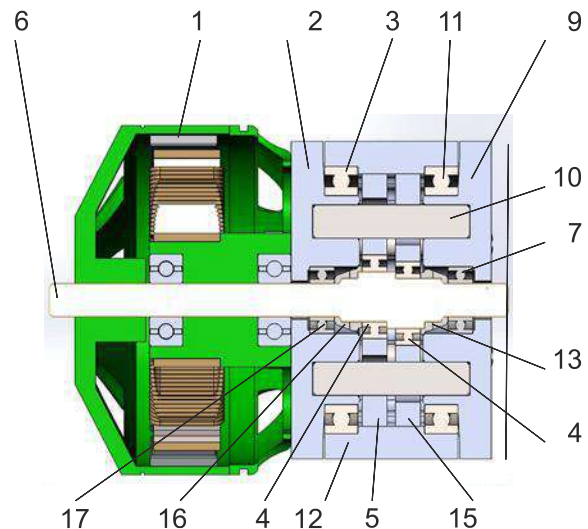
Assembly axial-section sketch of the BLDC electrical motor and cycloidal reducer developed
